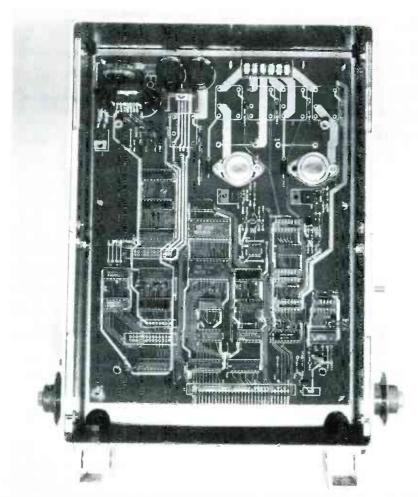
THE ROBOT'S ELECTRONICS mount on standoffs in the forward bulkhead. The control board is shown here; the RPC mou∎ts above it on hinged standoffs.
